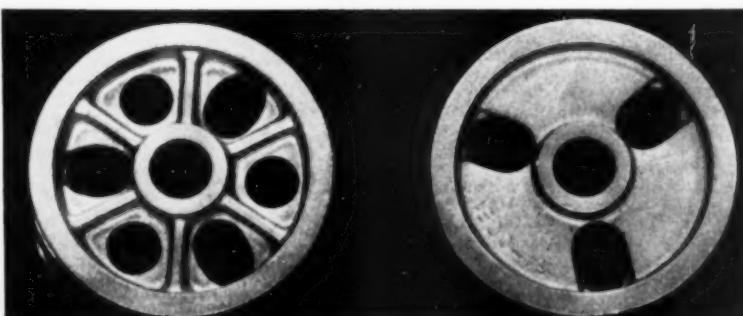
Original (Left) and Redesign (Right) of a Gear Blank Casting to Overcome Cracking of Ribs While the Part Was Still in the Hard Iron State
